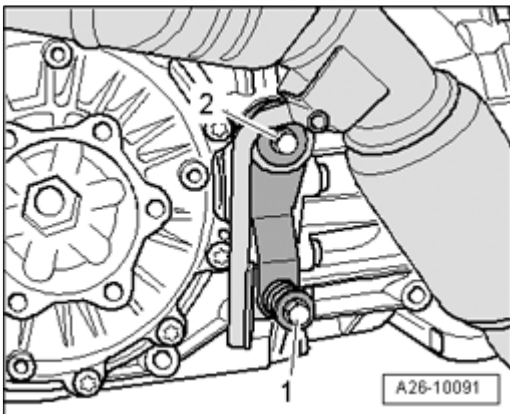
Removing Bolt At Left Bracket For Front Exhaust Pipe
